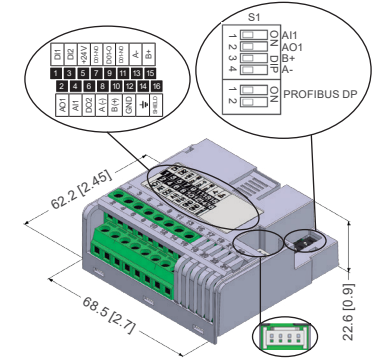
CPDP2 dimensions in mm [in], DIP-switches location and MCard connector
